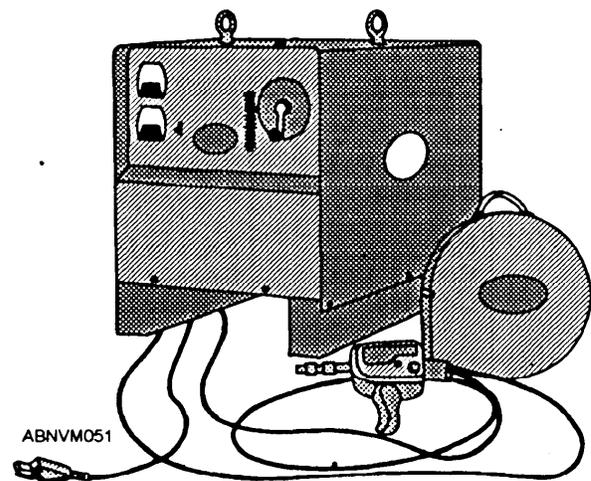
Heavy-duty GMA welding equipment (AIRCO products).
